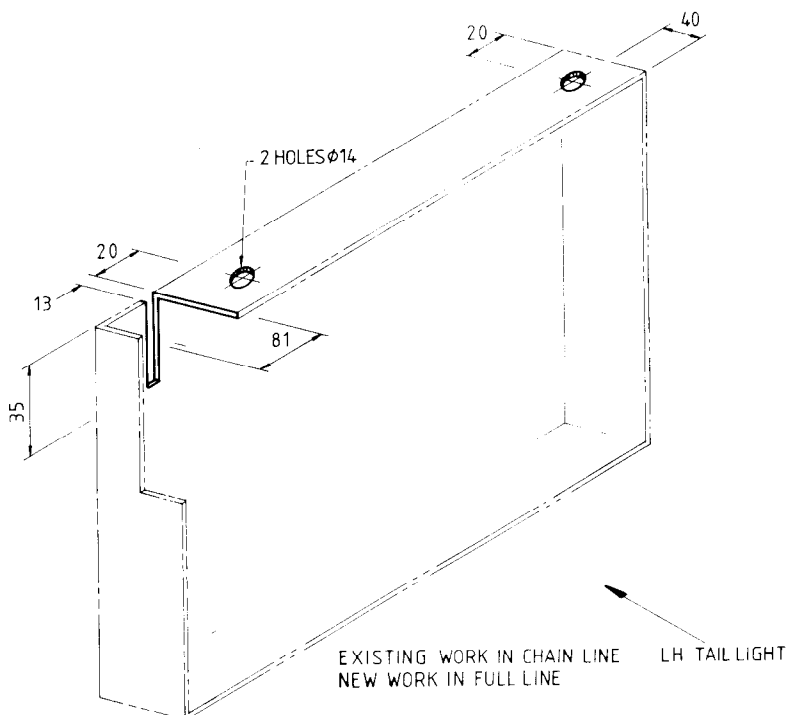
MODIFIED L/H LIGHT MOUNTING BRACKET
